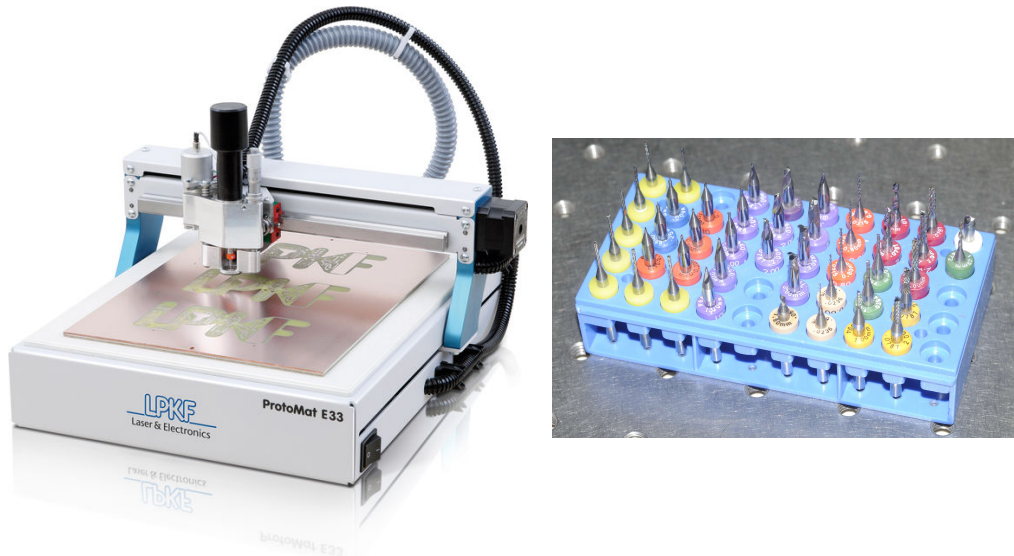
LPKF ProtoMat E33 machine with universal cutters/end mills/drill bits.
